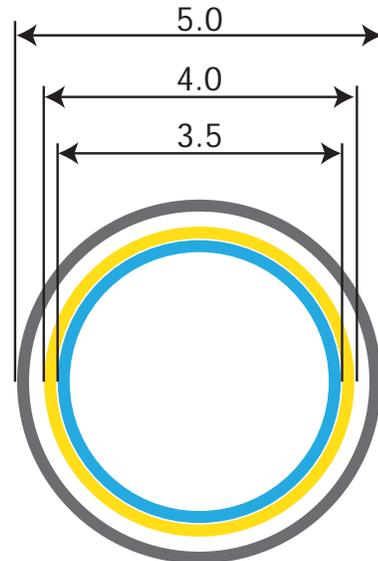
Central shaft: cross section dimensions. For the outer tube (grey) a tube with 5mm outside diameter was used. For the outer tube (yellow) a tube with 4 mm outside diameter was used. For the inner tube (blue) a tube with 3.5 mm outside diameter was used. All tubes have a wall thickness of 0.25 mm. The distance between outer and middle tube is 0.25 mm
